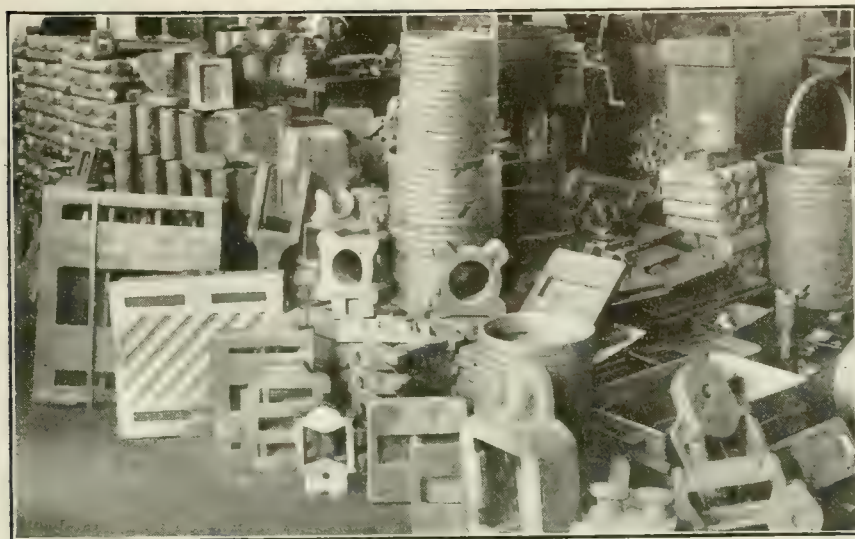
A MISCELLANEOUS ASSORTMENT OF PARTS FINISHED BY SURFACE GRINDING.
